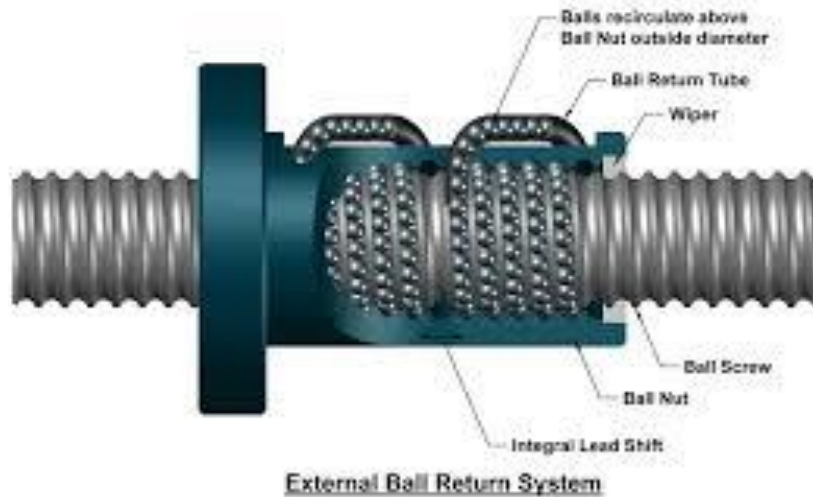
example of ball screw explaining its shape and the mechanism by which it works
